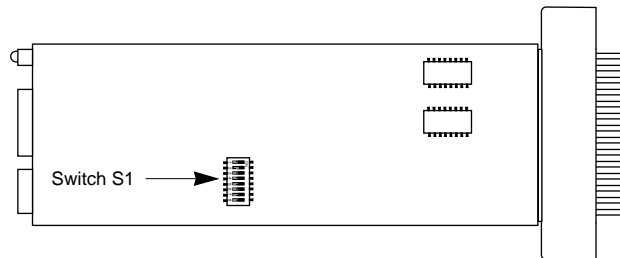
Position of the DIP Switches on the Model 2400/CM PC board
